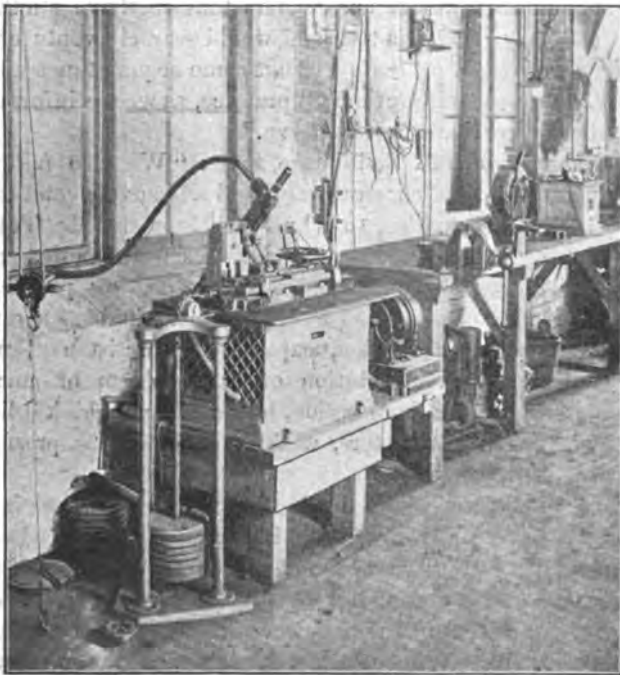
ELECTRIC WELDING AT THE OKONITE FACTORY.
